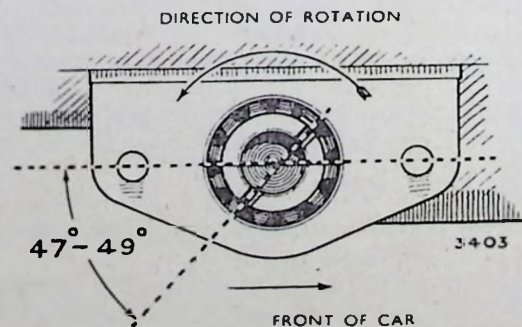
Oil pump correct assembly — No. 1 cylinder T.D.C. firing. (O.H.V. engine).
